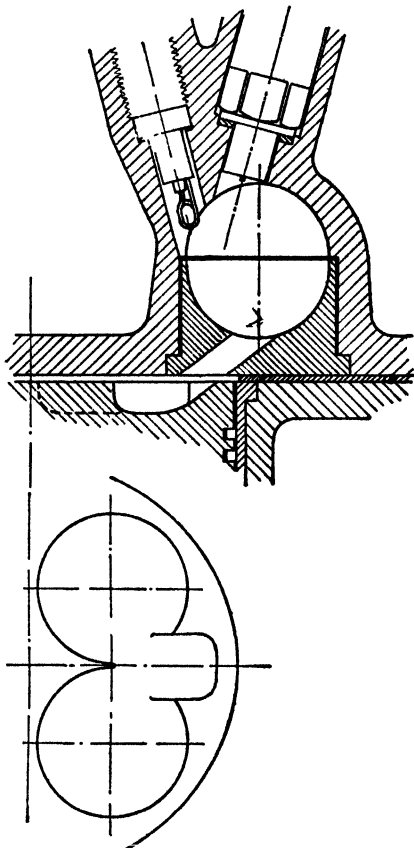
Ricardo Comet Mark III combustion chamber showing plan view of recess in piston
